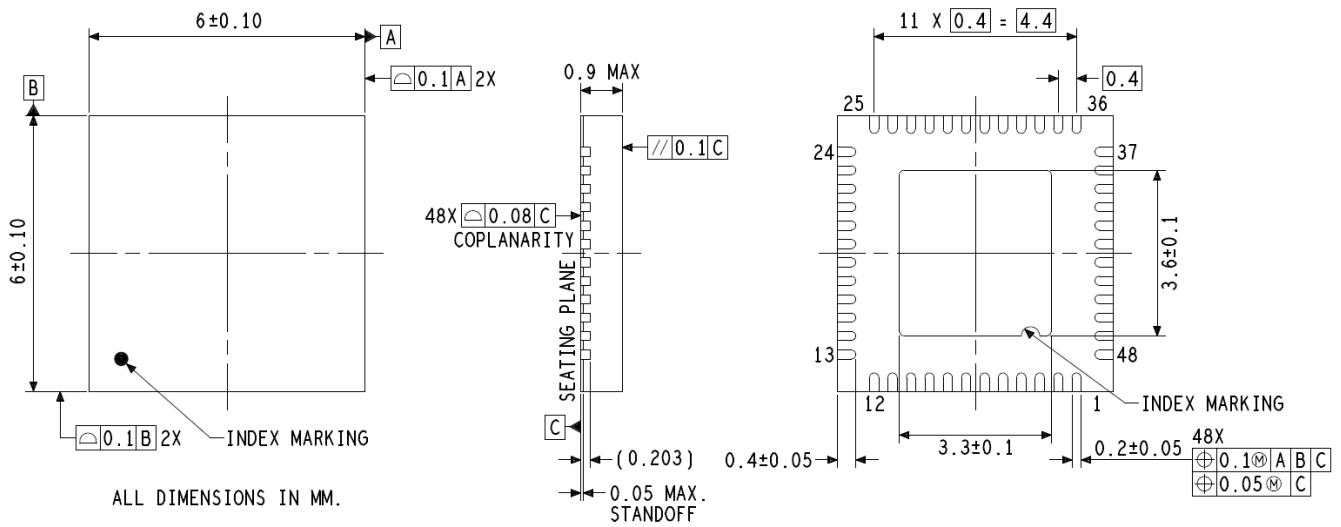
48-lead sawn QFN, 6mm x 6mm Package Dimensions
